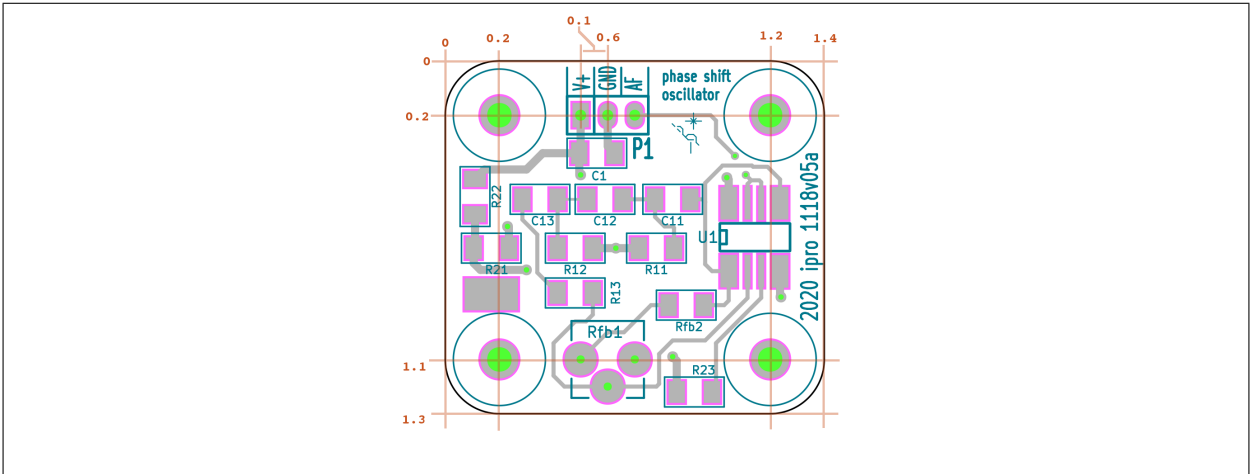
Gerbv layout dimensions. These are important for designing kicad modules for this board. I made a home-made board to fit it on (2020 ipro 1216v06d). I also make a kicad module so that it could be fit on other boards (2020 ipro 1122v05b). As of 2020-12-18, the kicad module hasn't been used yet. I'm waiting to do some experiments and decide what I want to design next. Maybe the kicad module won't be used until I design a full tx2m board.
